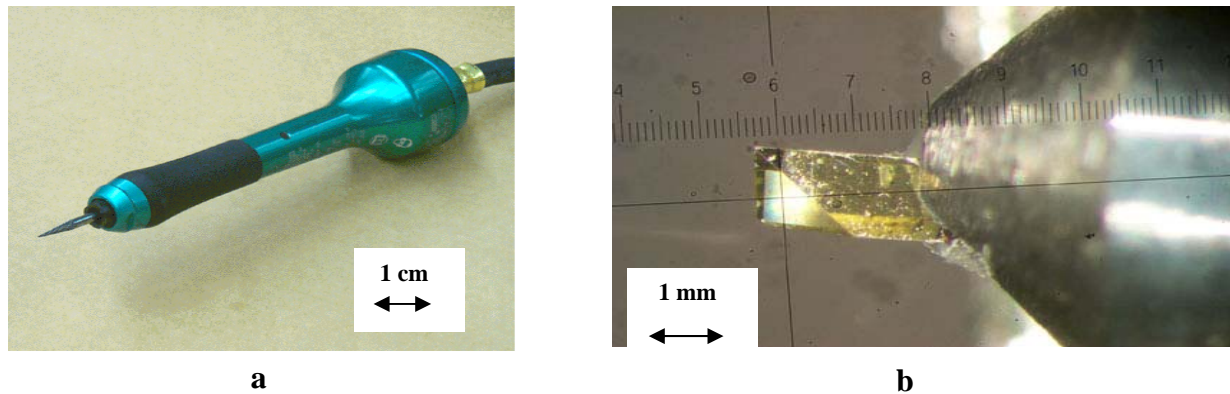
Spot micro-machining is done using a.) a high-speed air-turbine motor that turns 65,000 RPM , and b.) a single-crystal diamond end mill with a conical cutting edge.
